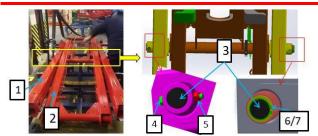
Installation of first layer fork 1. First outer arm welding 2. First inner arm assembly 3. Pin 4. Bolt
